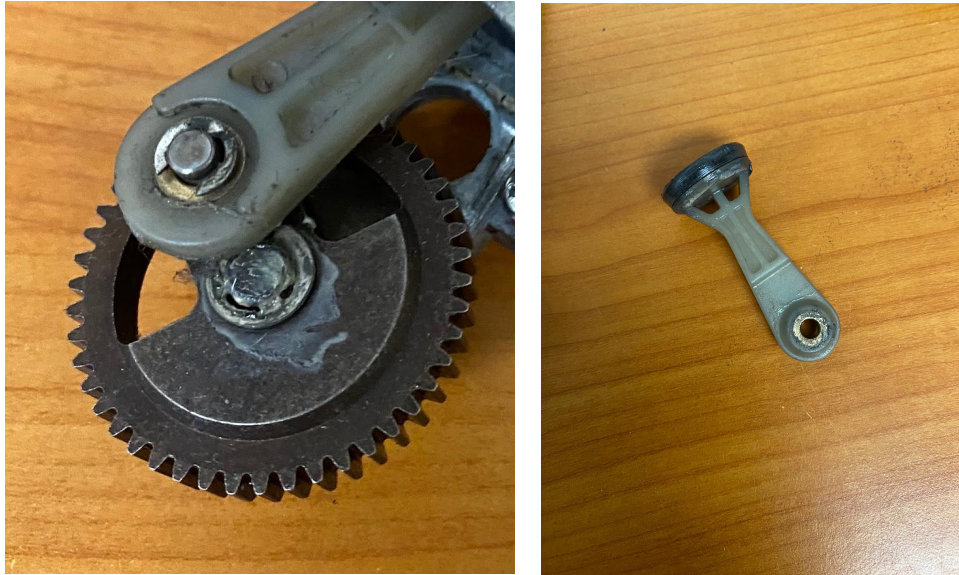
Gear attached to piston Figure 15: Piston, disconnected
